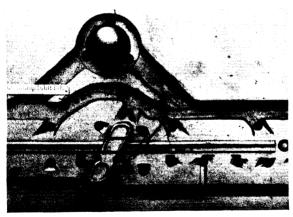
Section of the ejector half of a zinc die that failed by cleavage cracking.
